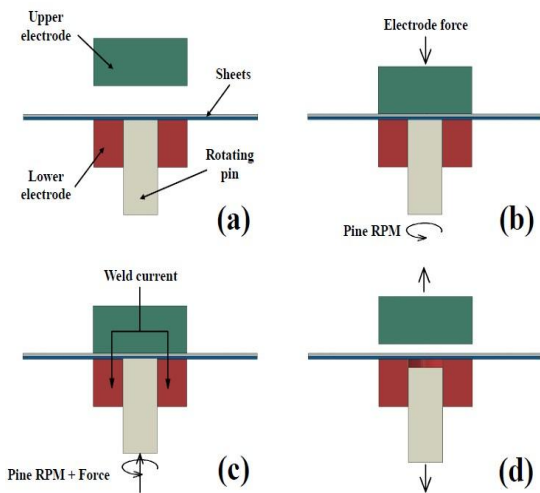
Process step of electric resistance heated surface friction spot welding process: (a) overlapping sheets, (b) pressing of electrode and rotating of pin, (c) applying current and heating (d)seperation after welding of sheets
